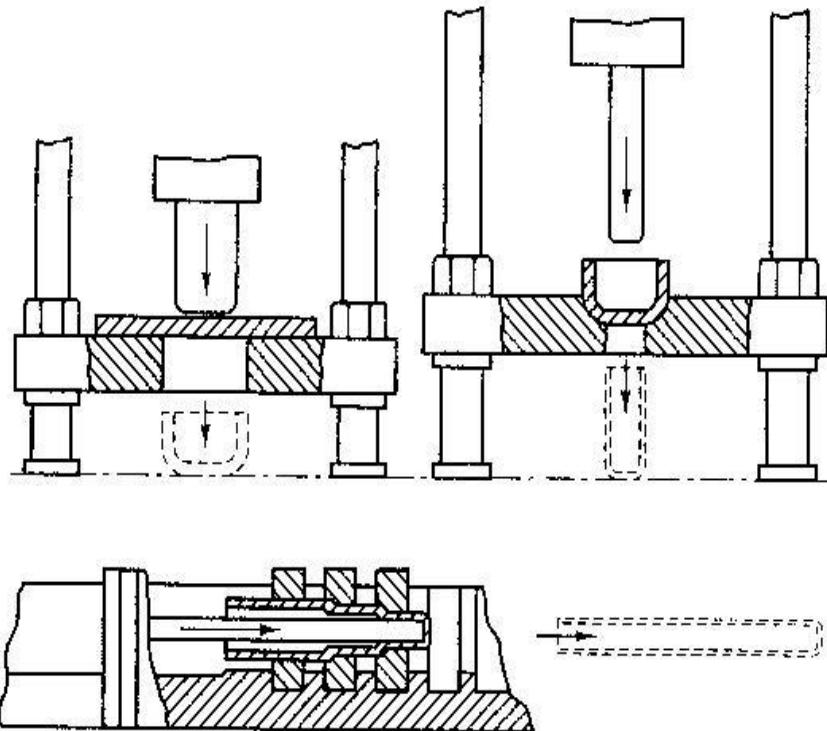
Methods of cup forming or hot drawing. (Upper left) First draw. (Upper right) Redraw operation. (Lower) Multiple-die drawing. (Courtesy of USX Corporation.)
